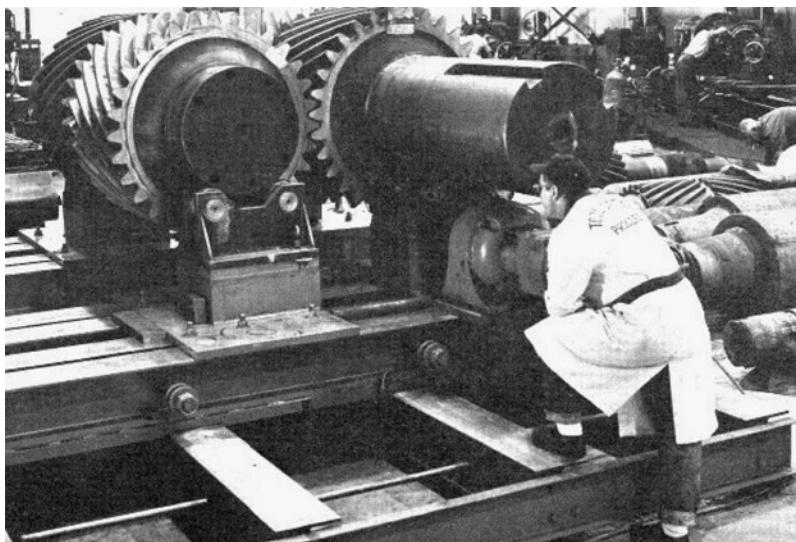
Giant carburized pinions, $\frac{3}{4}$ pitch—68 face width pass contact test without grinding. (Courtesy of Tool Steel Gear and Pinion Company, Cincinnati, Ohio.)
